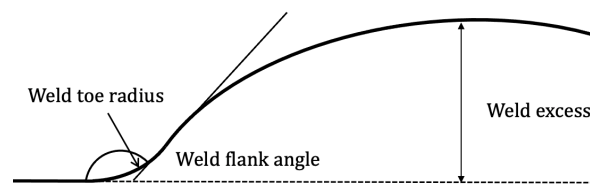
Parameters of the weld excess that will be studied in this chapter
